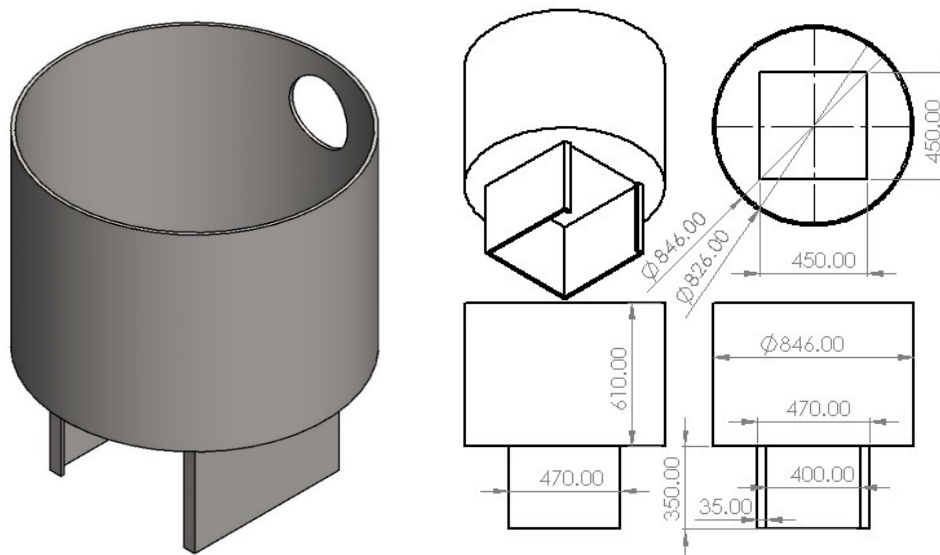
Inner Sheet Metal with its dimensions of Square Cook-Stove Model.
